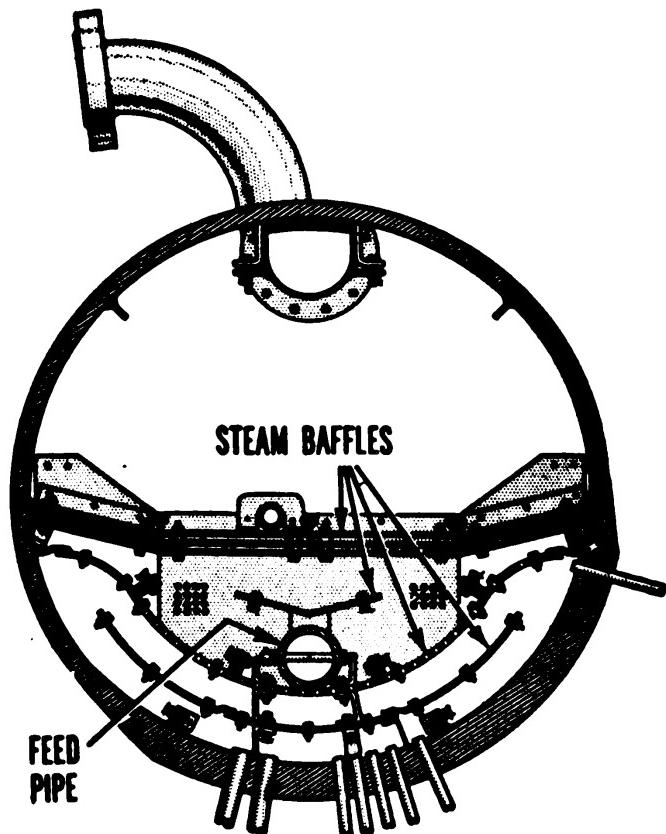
Arrangement of steam baffles in boiler steam drum.
